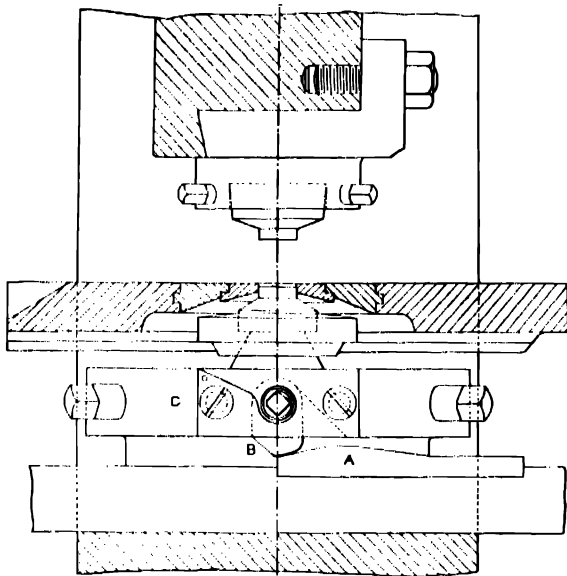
High-speed extractor mechanism of Taylor & Challen coining press.
